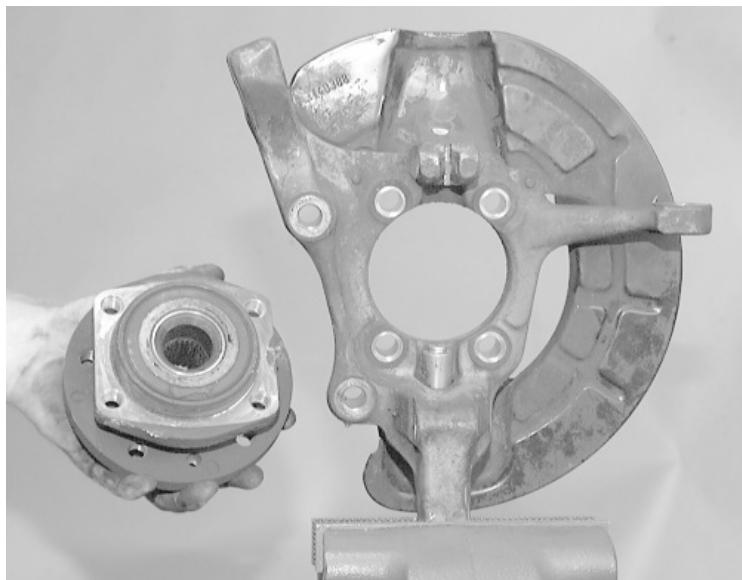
Separate the hub from the spindle after the retaining bolts are removed
